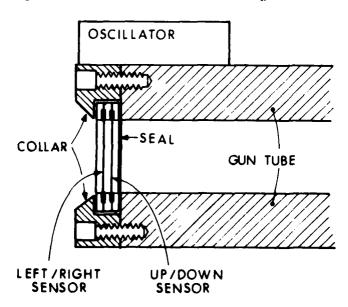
Cross-Sectional View of the Sensor Coils Attached to the Gun Tube
